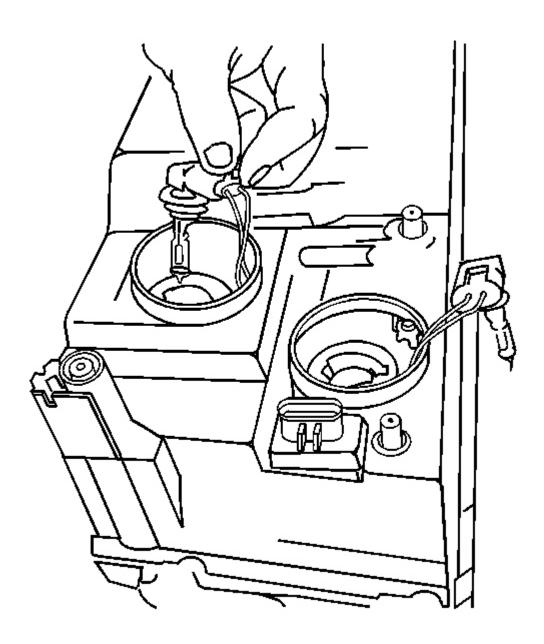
View Of Headlamp Socket & Bulb Courtesy of GENERAL MOTORS CORP.
